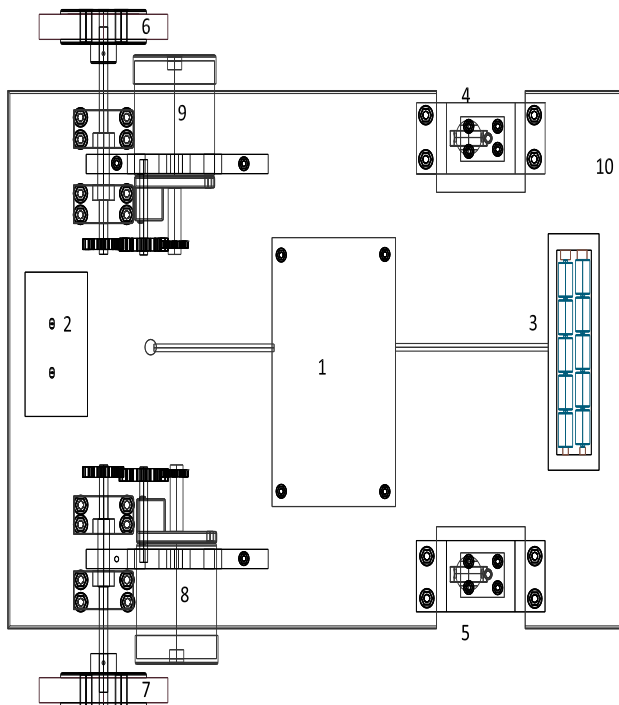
Schematic View of the Robot The complete design of the robot (top view): 1: Circuit box, 2: Sensor circuit, 3: Battery box, 4: Back free wheel 1, 5: Back free wheel 2, 6: Front power wheel 1, 7: Front power wheel 2, 8: Stepper Motor 1, 9: Stepper Motor 2 and 10: Base
